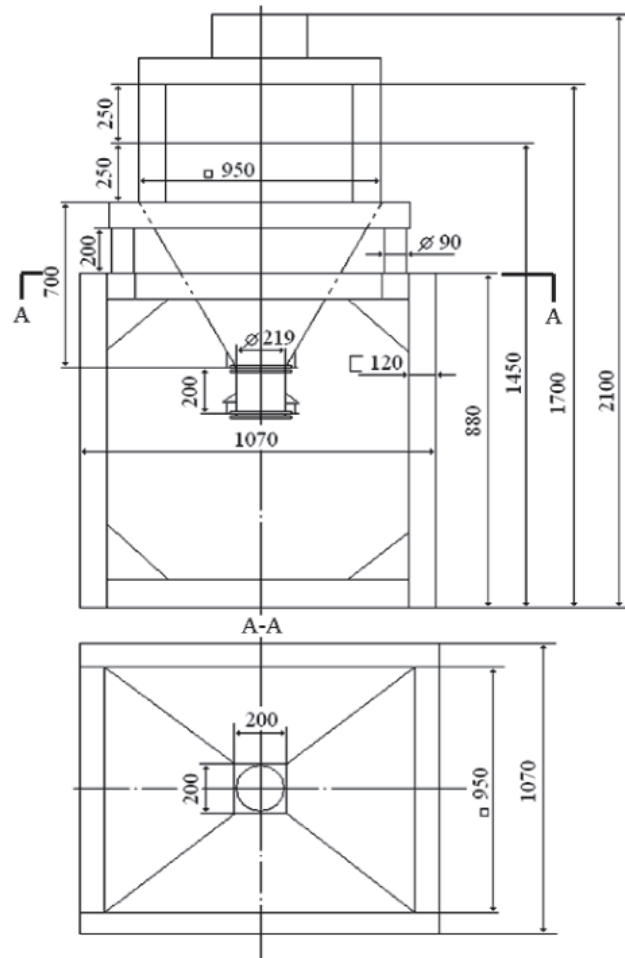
Dimensions of the industrial vibration milling unit performance of 1500 kg/hour
